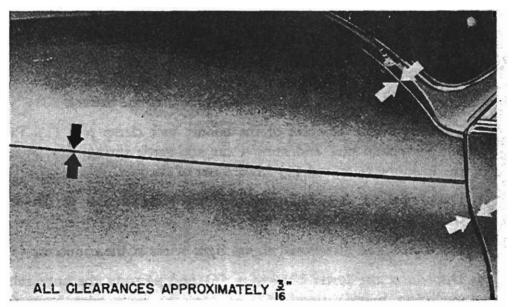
Adjacent Parts Should Be Flush, and Have a Uniform Clearance.
